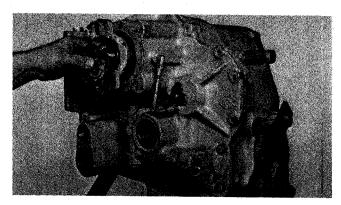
Install input shaft flange nut "O" ring, washer and nut. Tighten nut 200 to 250 ft. lbs. torque [271,2 - 339,0 N.m]. Install front cover plug an sump screen assembly.
